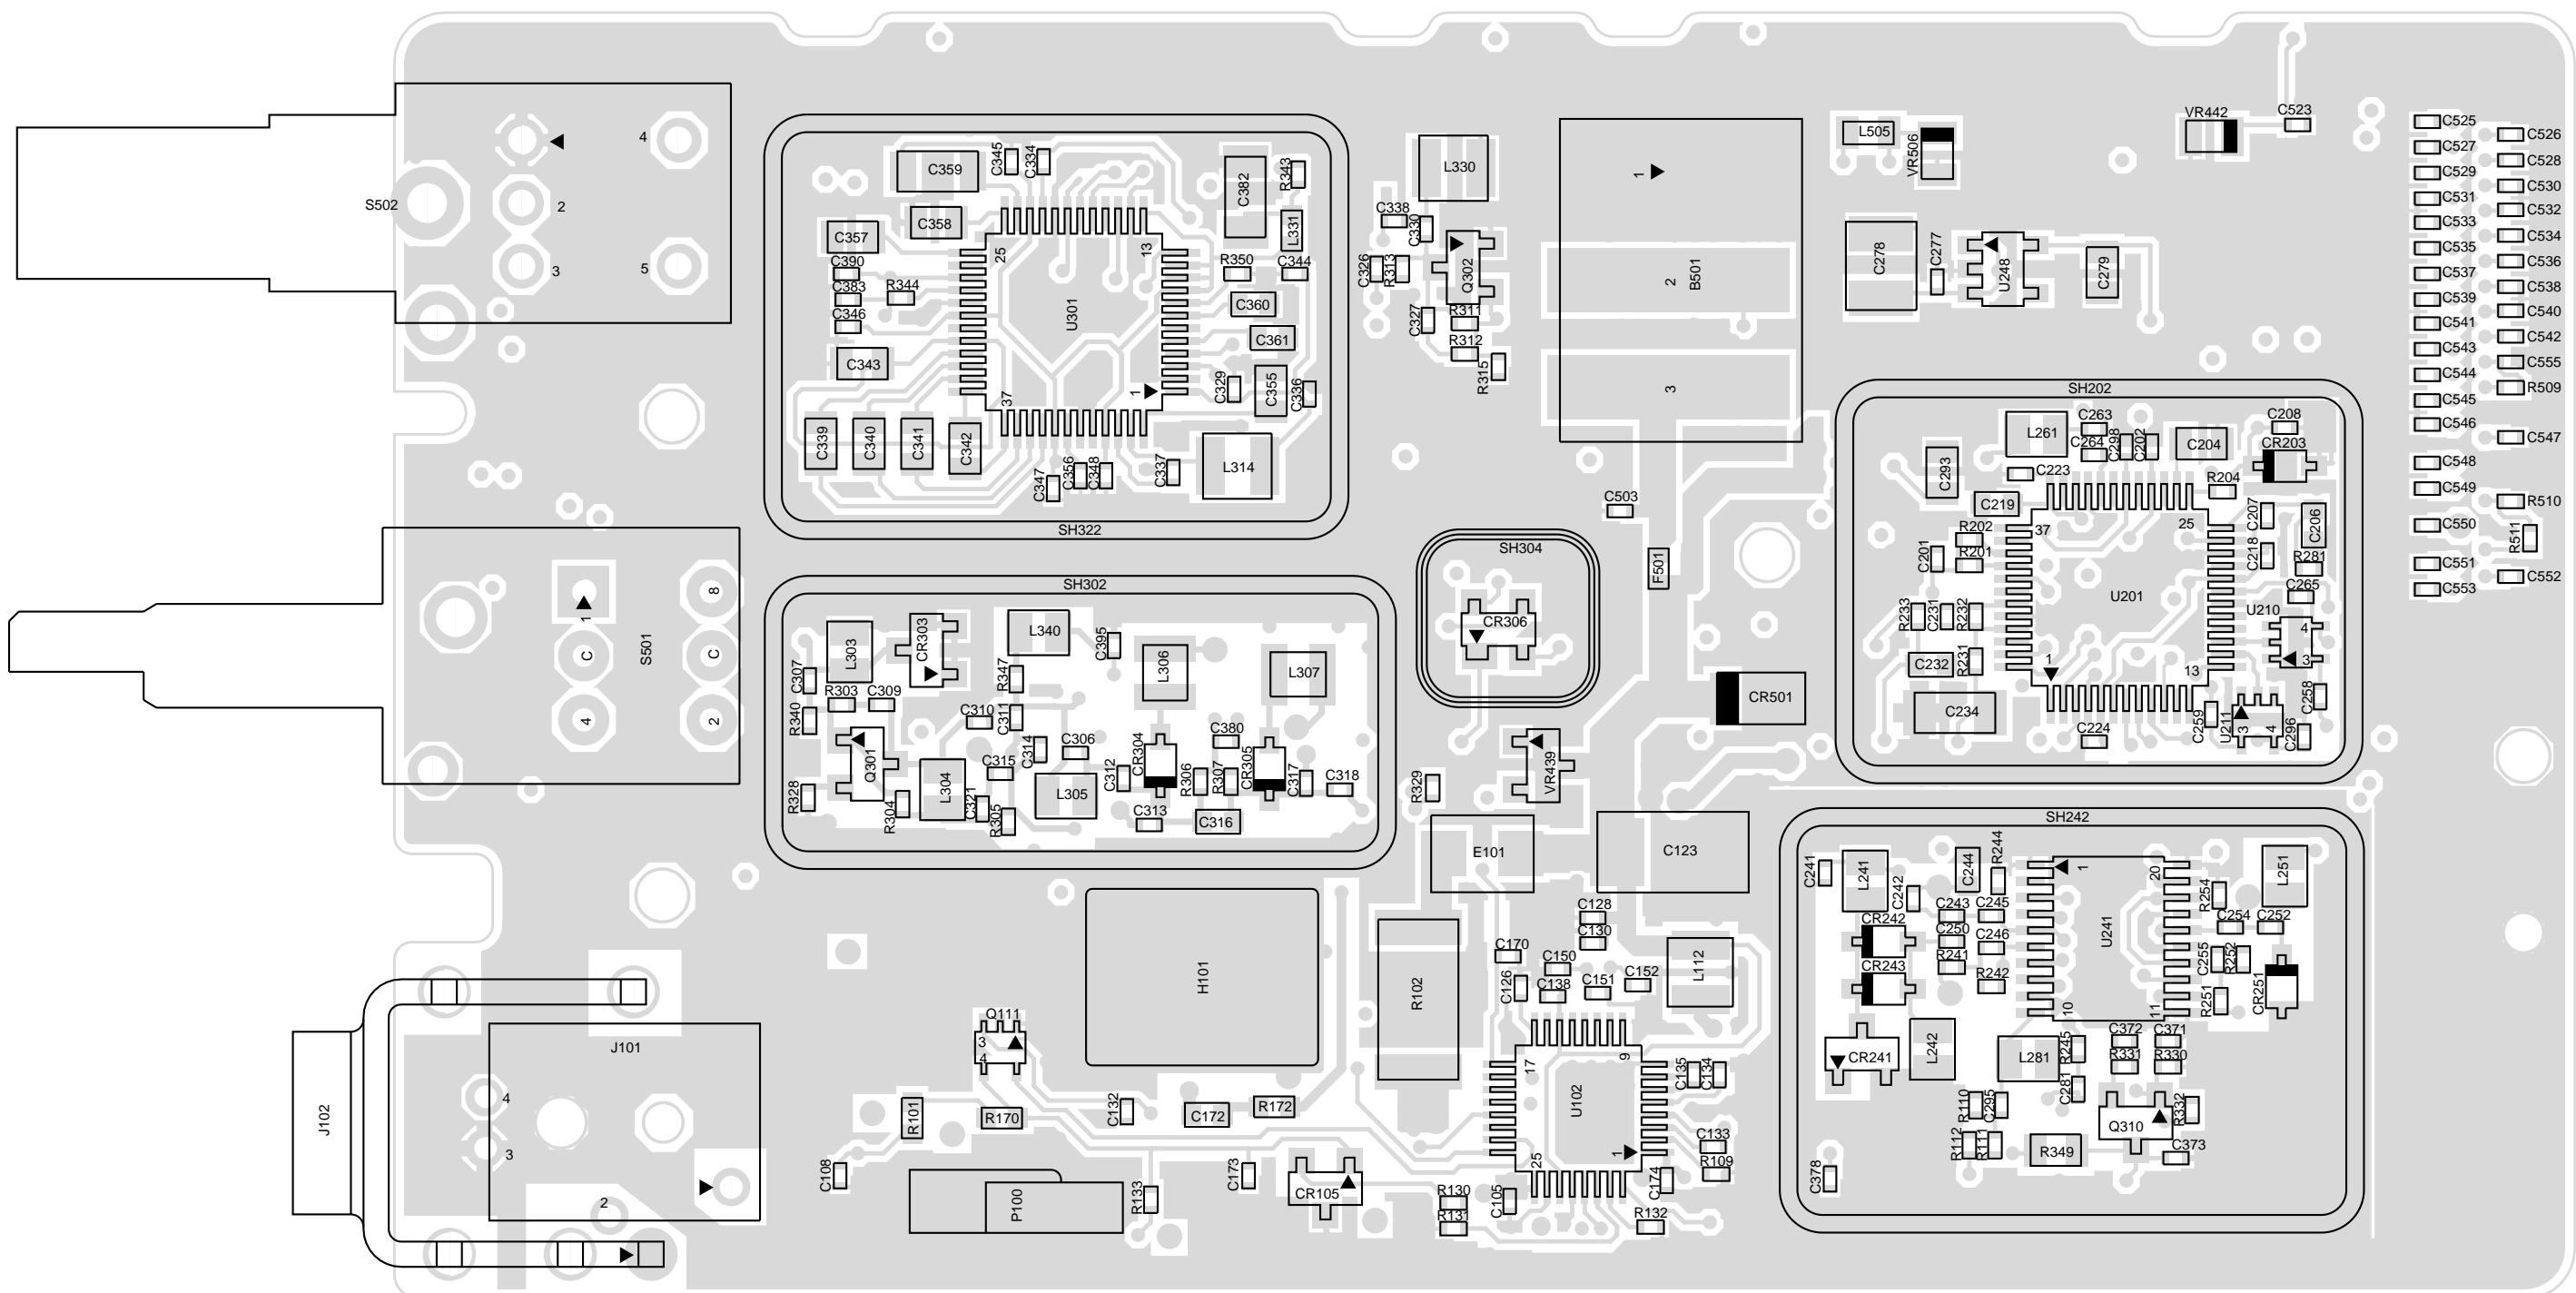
UHF (403-470MHz) Main Board Bottom Side PCB No. 8404077G01
